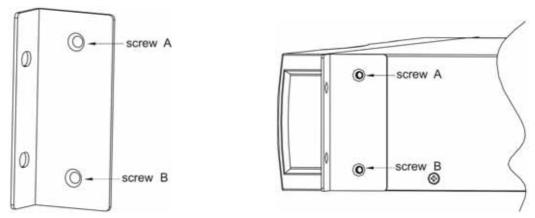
Cabinet installation bracket Fig 12 Cabinet installation bracket assembly screw the two M4 screws described as Fig 10 (symmetrical on both sides, a total of four).
